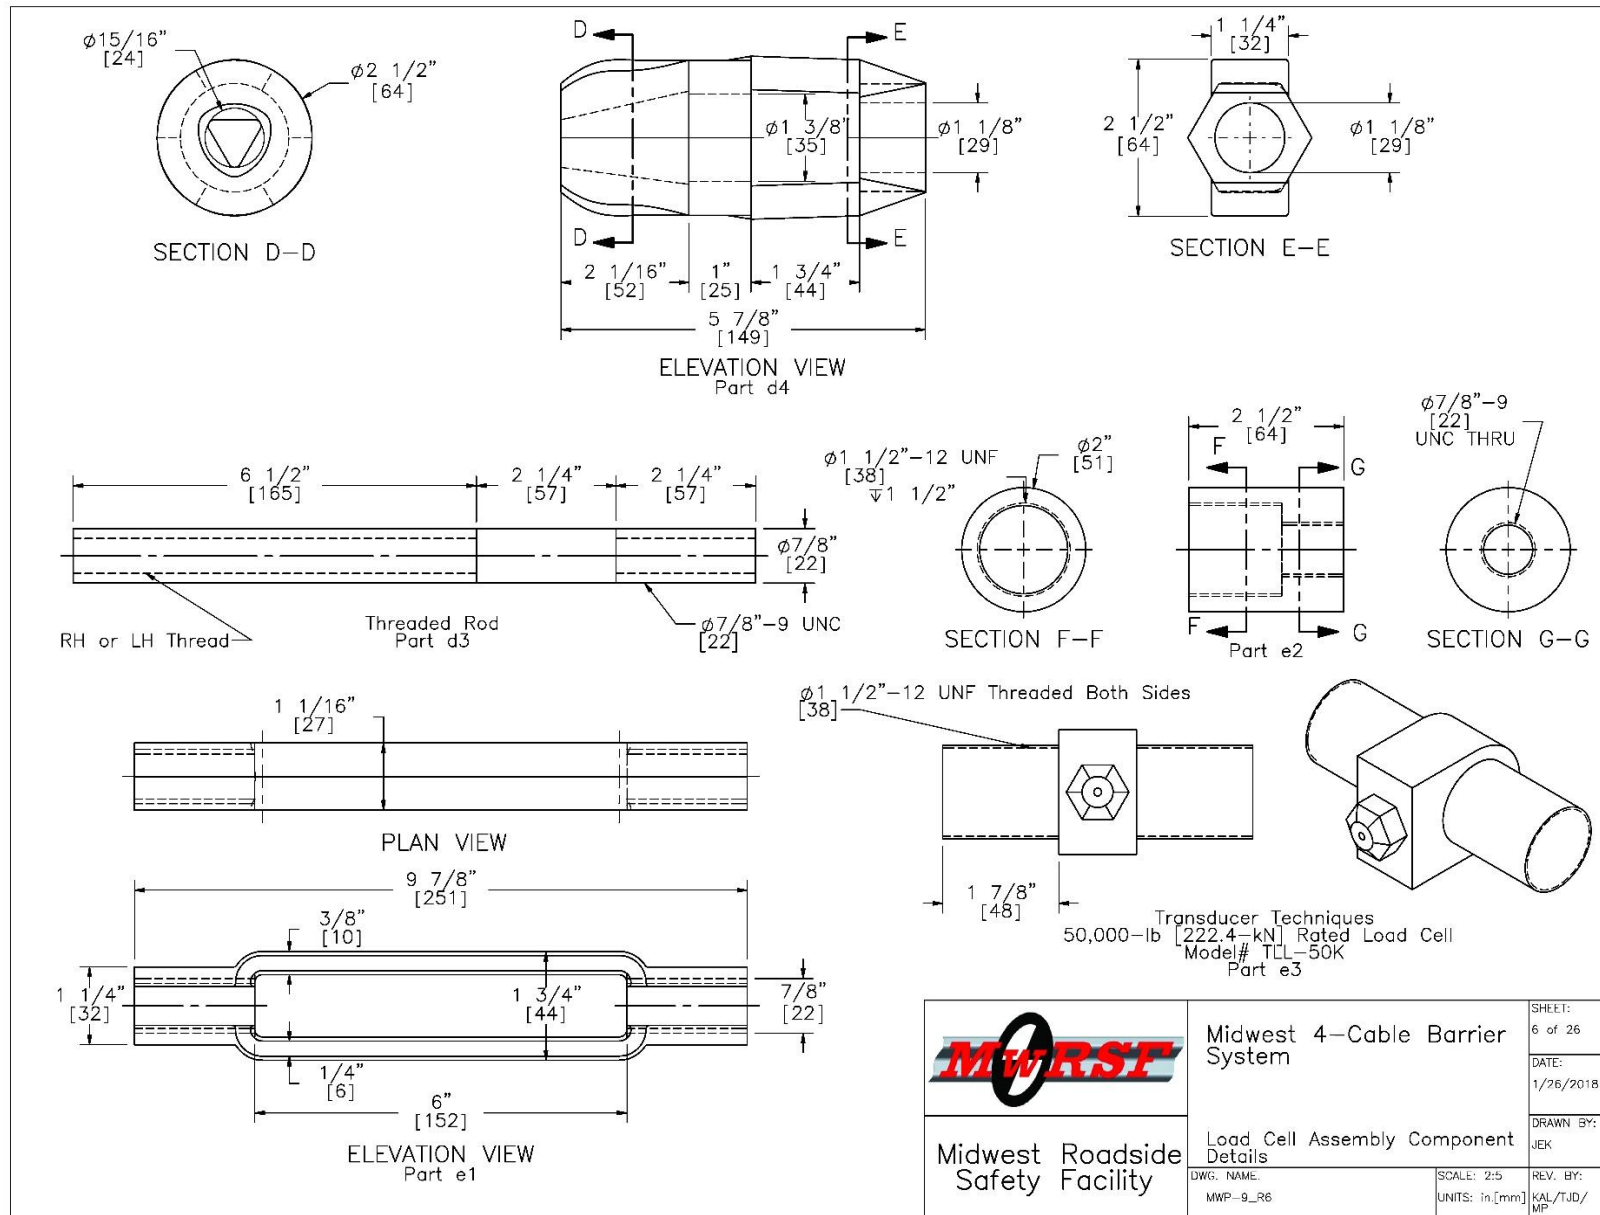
Load Cell Assembly Component Details, Test No. MWP-9
